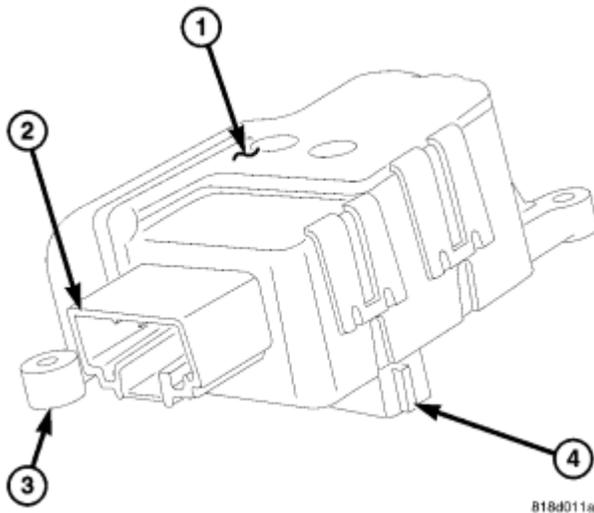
Identifying Blend Door Actuator, Integral Wire Connector Receptacle, Integral Mounting Tabs & Output Shaft
